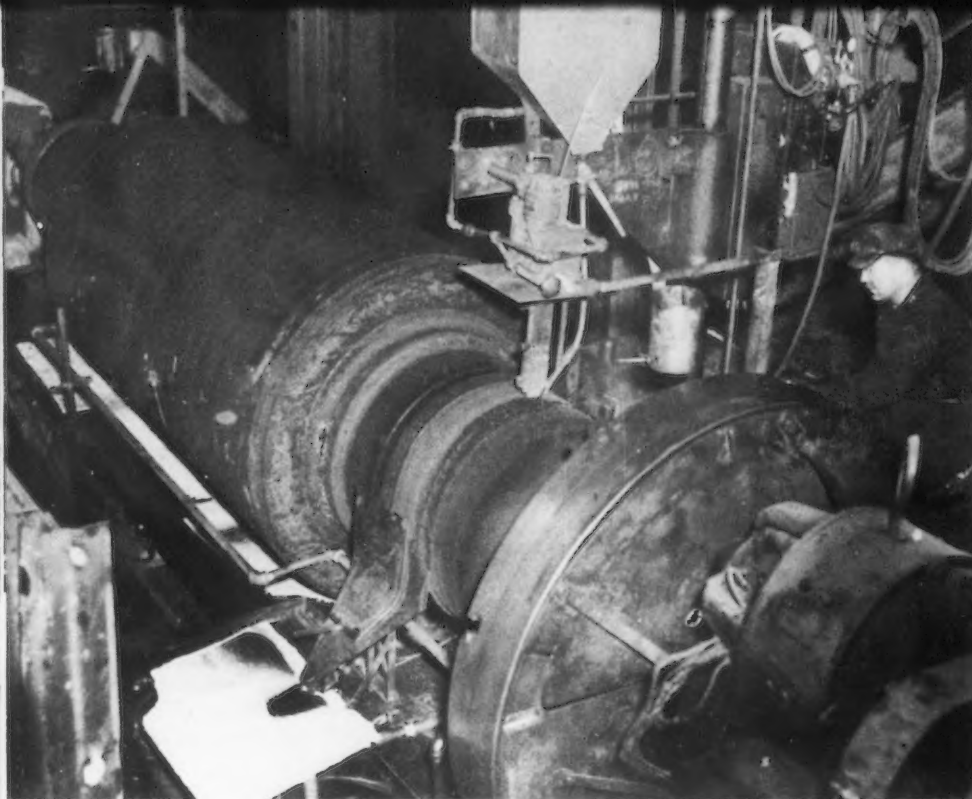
The journals of this cast alloy steel backup roll for a 100-in. semi-continuous plate mill were built up by welding. Rolls weigh 90,000 lb, have a journal diameter of 31 in., a roll diameter of 54½ in., and a length of 18 ft 4 in.
